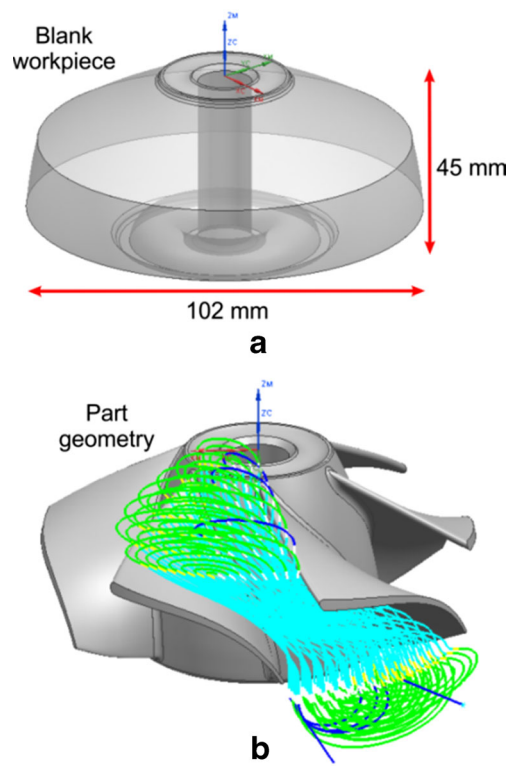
Example 1: a blank workpiece and b part geometry and toolpath
